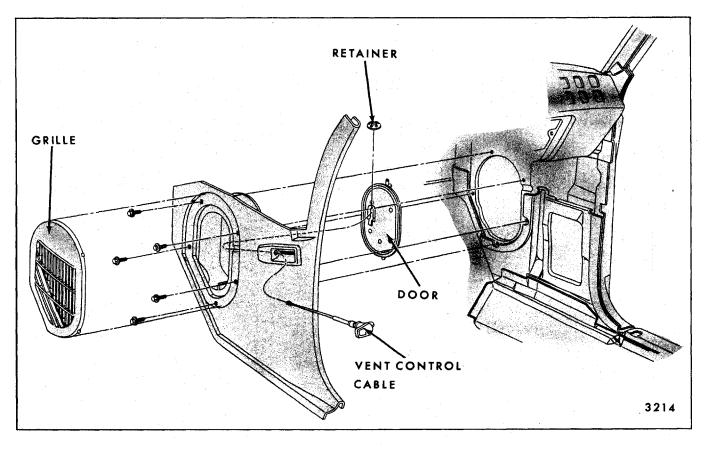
Shroud Side Finishing Panel - X Styles
